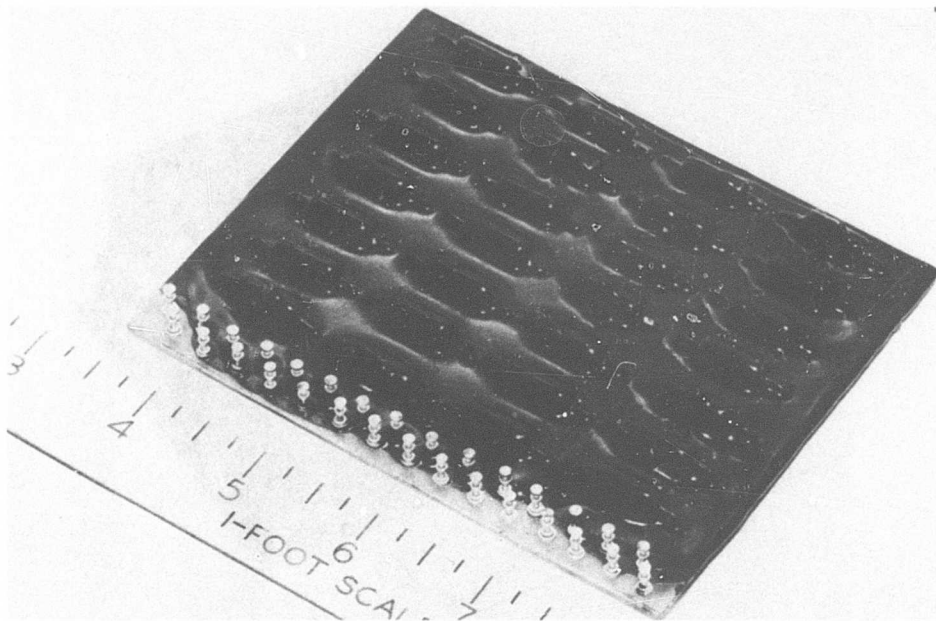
Test Circuit Board With Thermally Conductive Coating.
